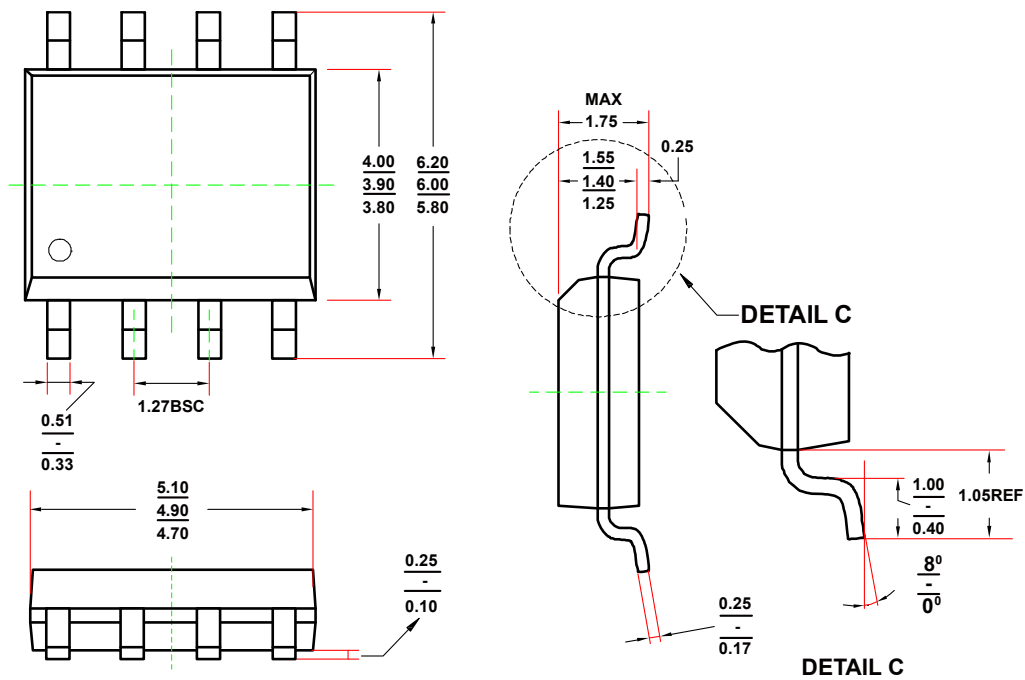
8-Lead SOIC Package Dimensions shown in millimeters
